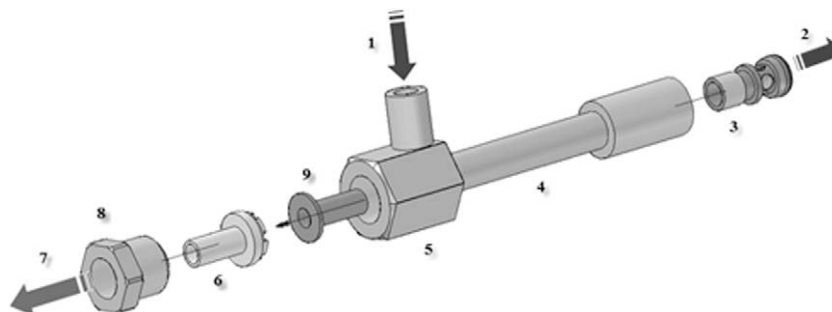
Components of commercial vortex tube: 1 – air inlet; 2 – hot exit; 3 – control valve; 4 – main body; 5 – vortex chamber; 6 – generator; 7 – cold exit; 8 – threaded ring nut; and 9 – brass inset.
